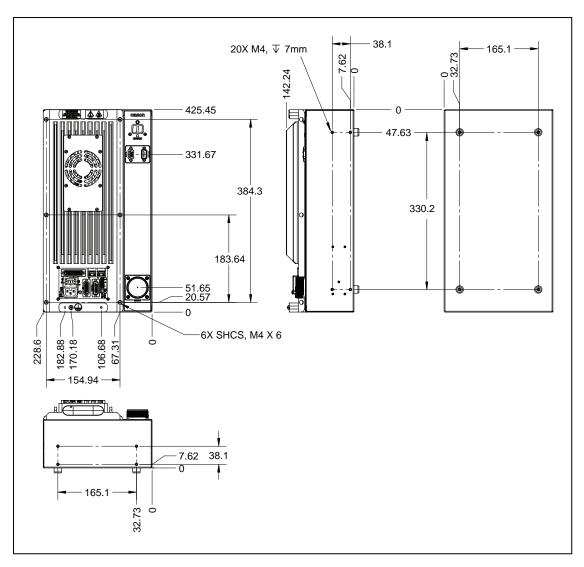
eCS-ECAT Dimensions (units in mm)
